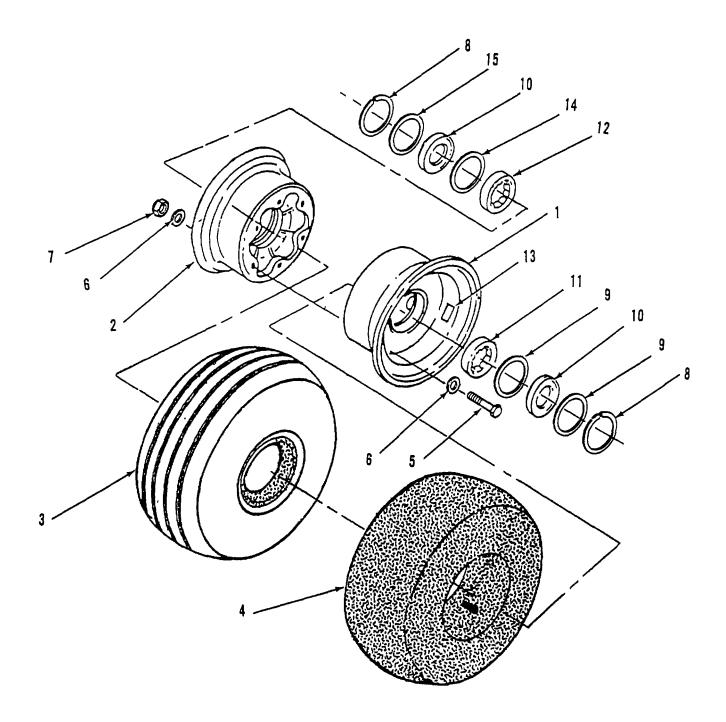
Wheel Assembly for Model 214-706-104-101
